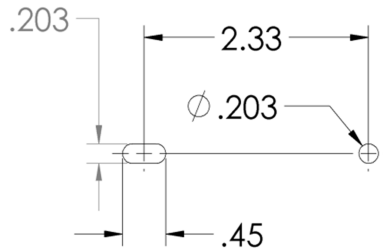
Physical dimensions. All dimensions are in inches unless otherwise indicated.
